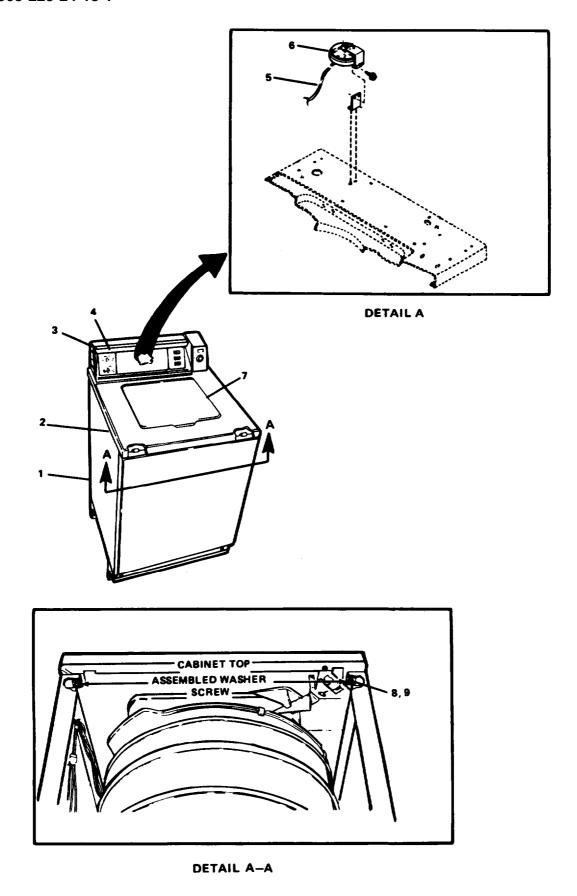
Washer Machine Cabinet Top Removal.
